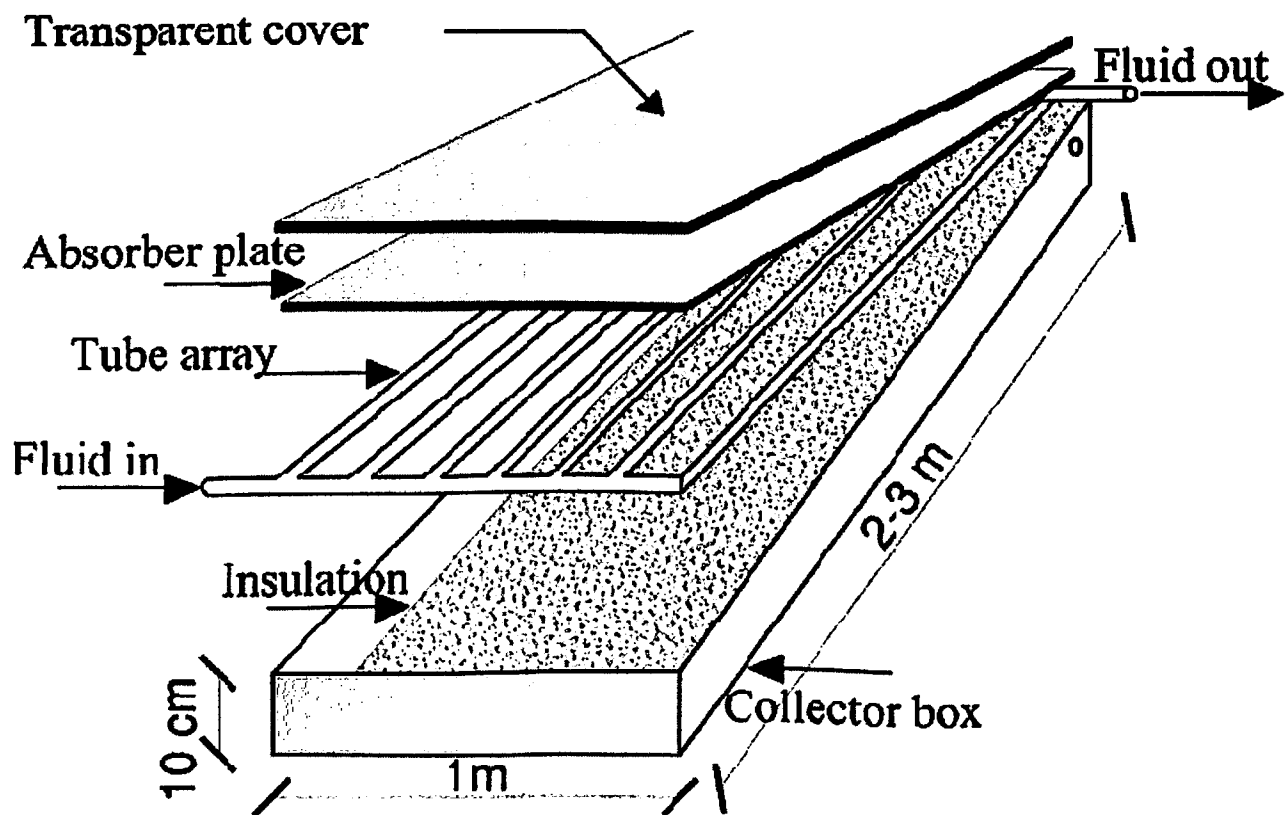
Cross-section and isometric view of flat-plate collector
